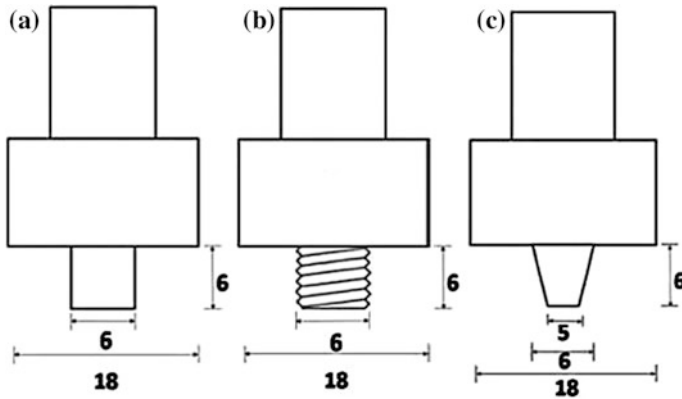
FSW tools. a Cylindrical. b Threaded cylindrical. c Tapered [20]
